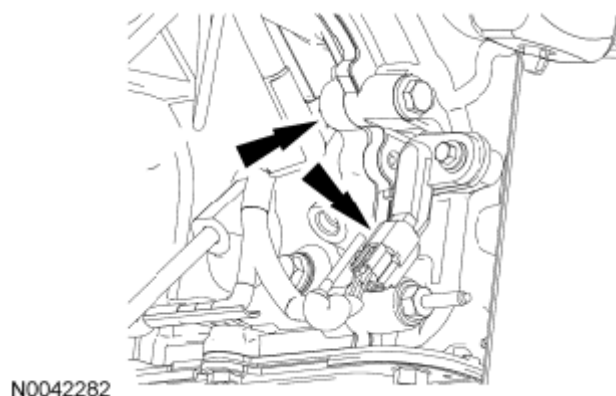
Identifying Crankshaft Position Sensor Electrical Connector And Wiring Harness Retainer
